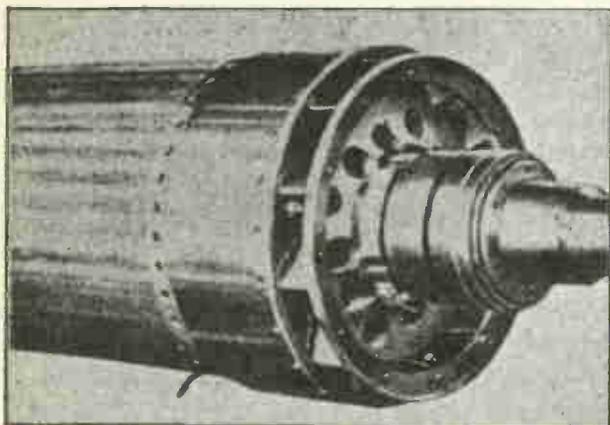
End-view of high speed field rotor showing shield ring over the coil ends and also showing ventilating blades and slip rings.
